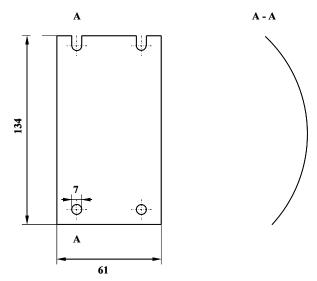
Mechanical drawing of a stainless steel sample plate used in deposition tester. Width 61 mm, height 134 mm and hole diameter 7mm.
